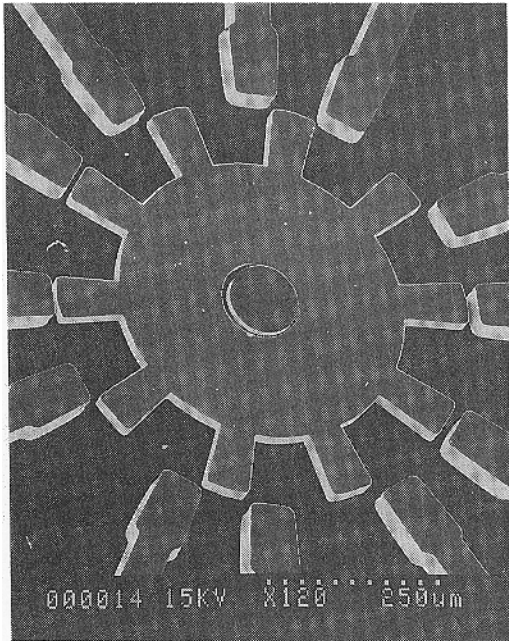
SEM of a separately fabricated and released nickel-iron rotor which has been microassembled onto a nickel-iron pin/stator assembly, illustrating the ability to perform microassembly with these structures.
